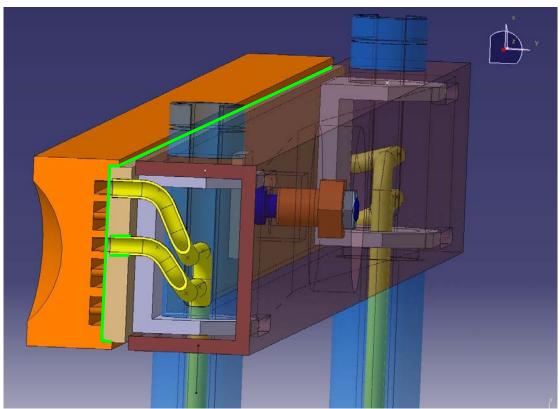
3D view of the jaw assembly. Brazed surfaces are highlighted.
